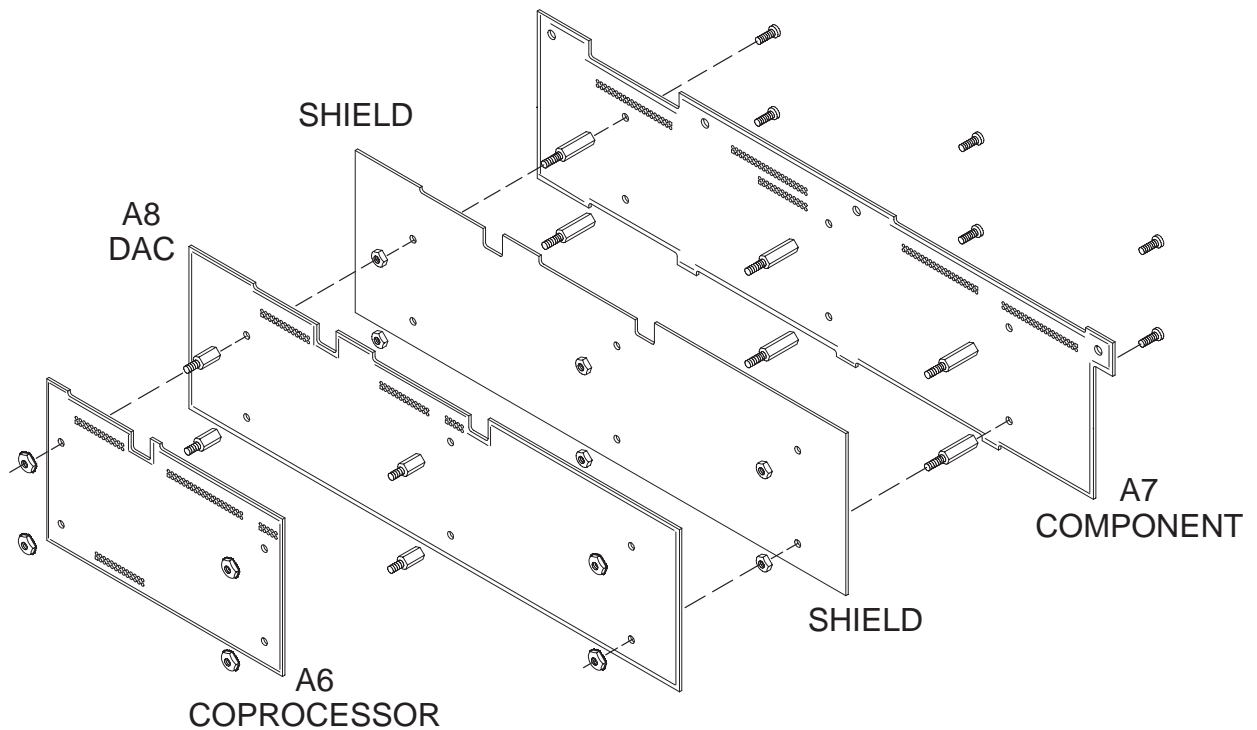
Separating the Component, Coprocessor, and DAC Boards
